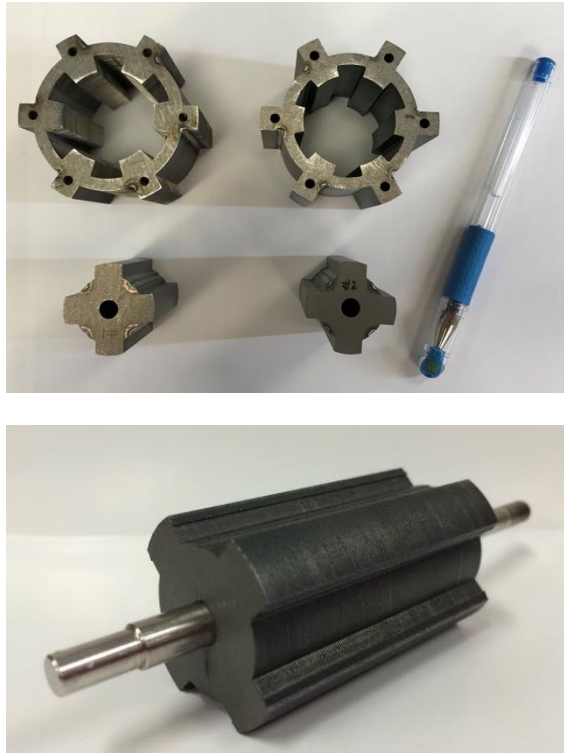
Lamination stacks, up left: CSR; upright: resized TSR, bottom: the assembled rotor.
